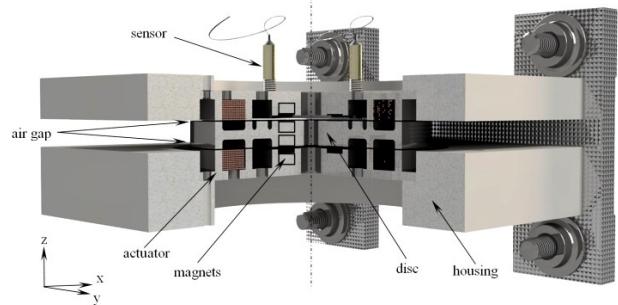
3D CAD model of the Hybrid Axial Magnetic Bearing with indication of respective elements and coordinate system.
